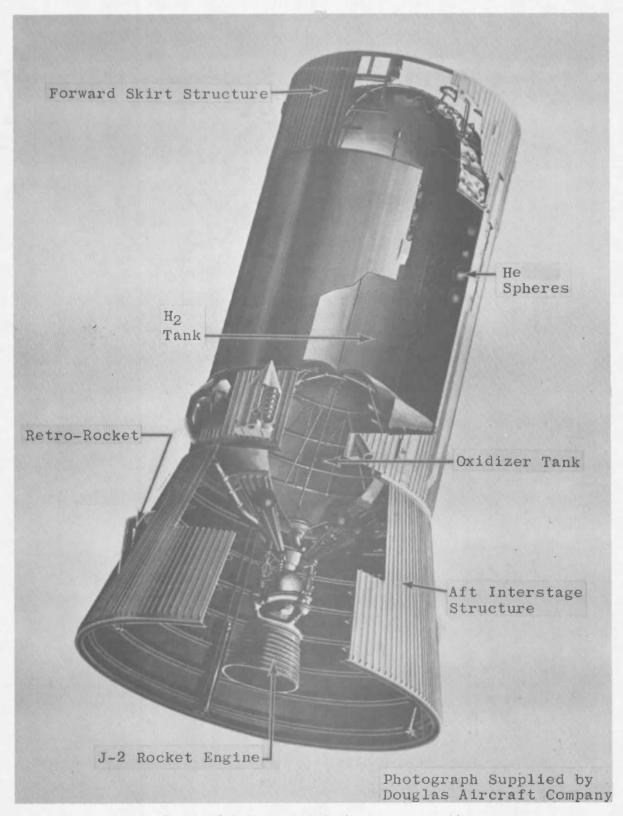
J-2 Engine and S-IVB Flight Stage Assembly
